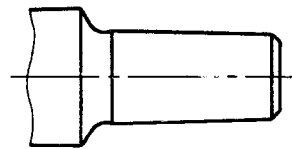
TAPER SHANK $>$ DRILL CHUCK TAPER
